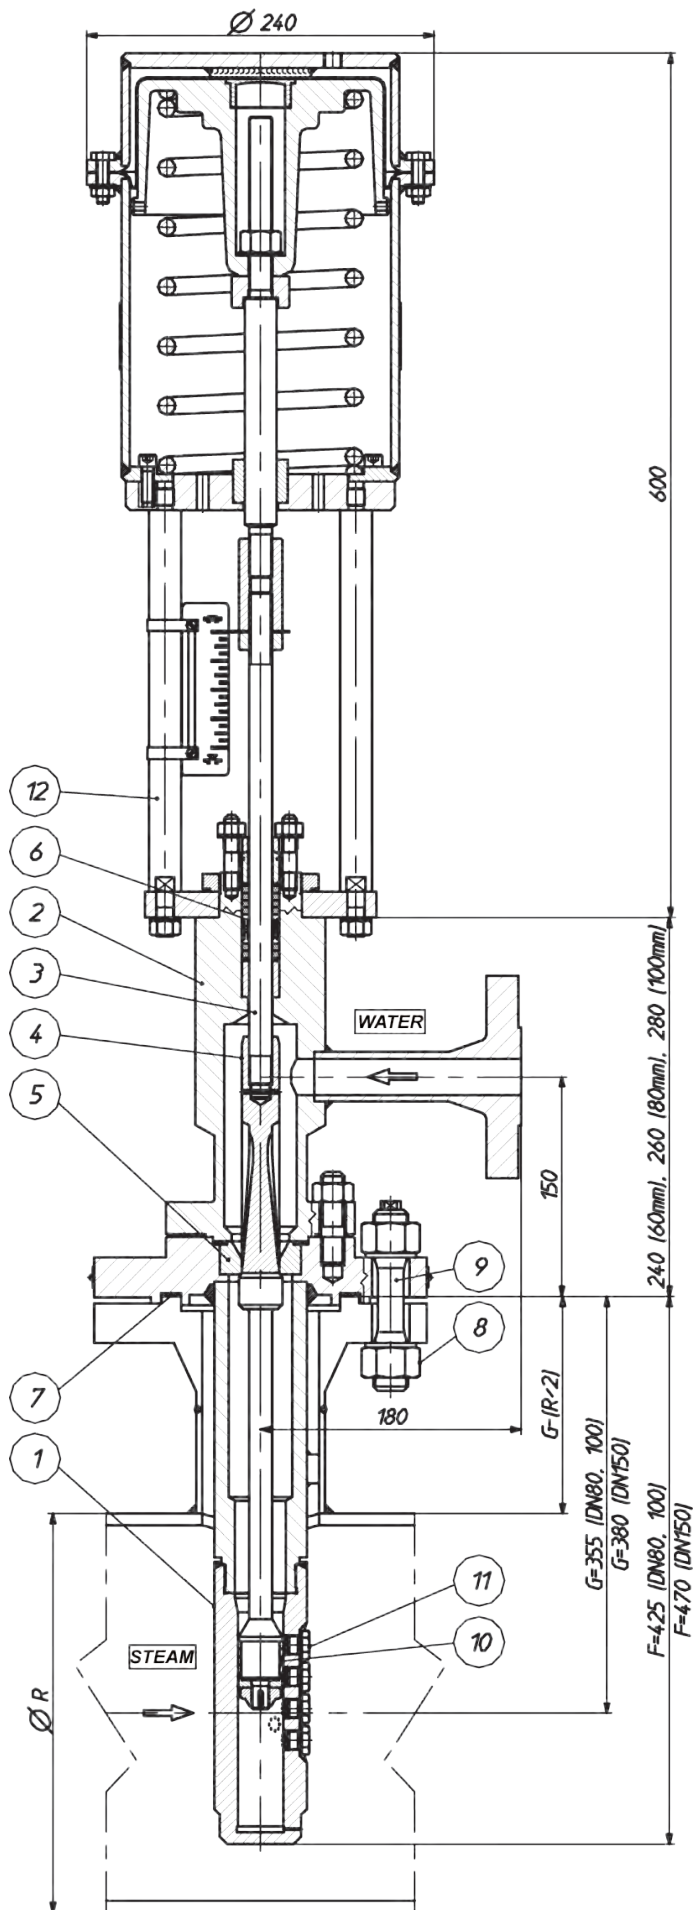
Desuperheater cross-section and overall dimensions (other dimensions upon request).
